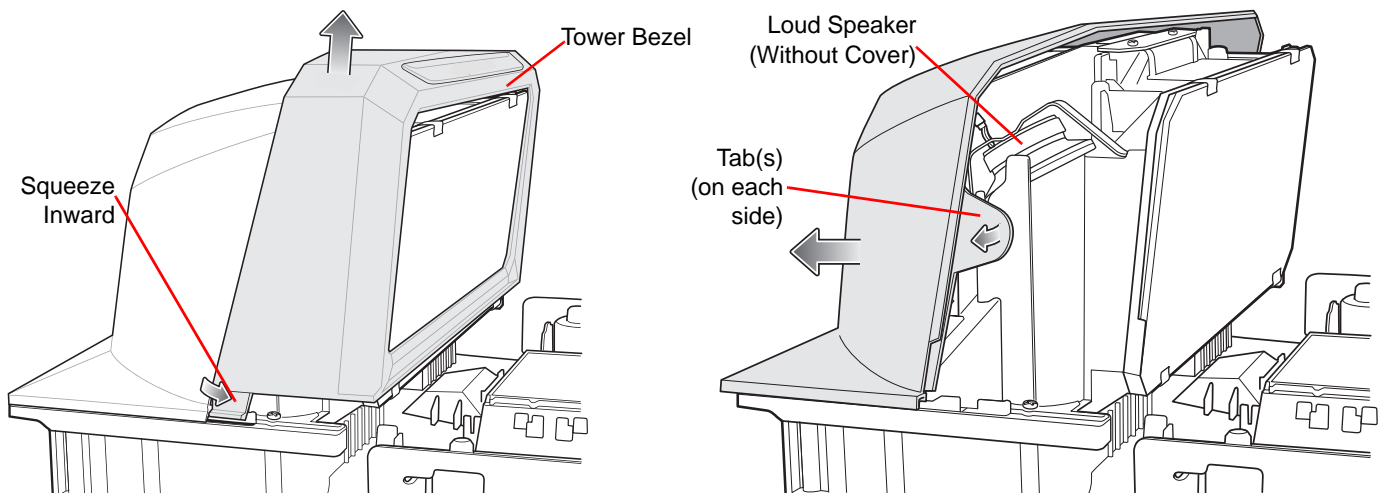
Removing the MP6000 Tower Bezel and Tower Cover; Loudspeaker
